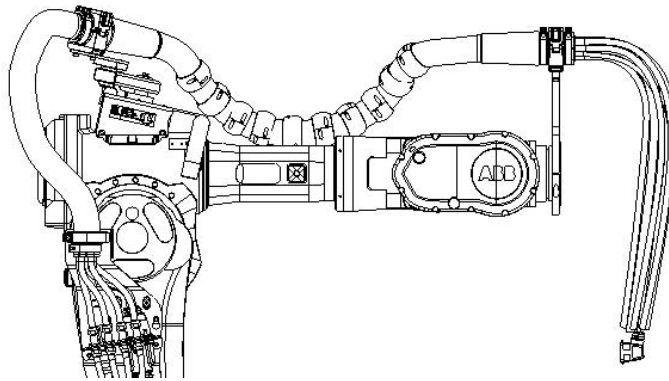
“Orange line” DressPack Upper arm right arm side view SpotWelding version (option 778-2, option 780-2 and option 798-2).
